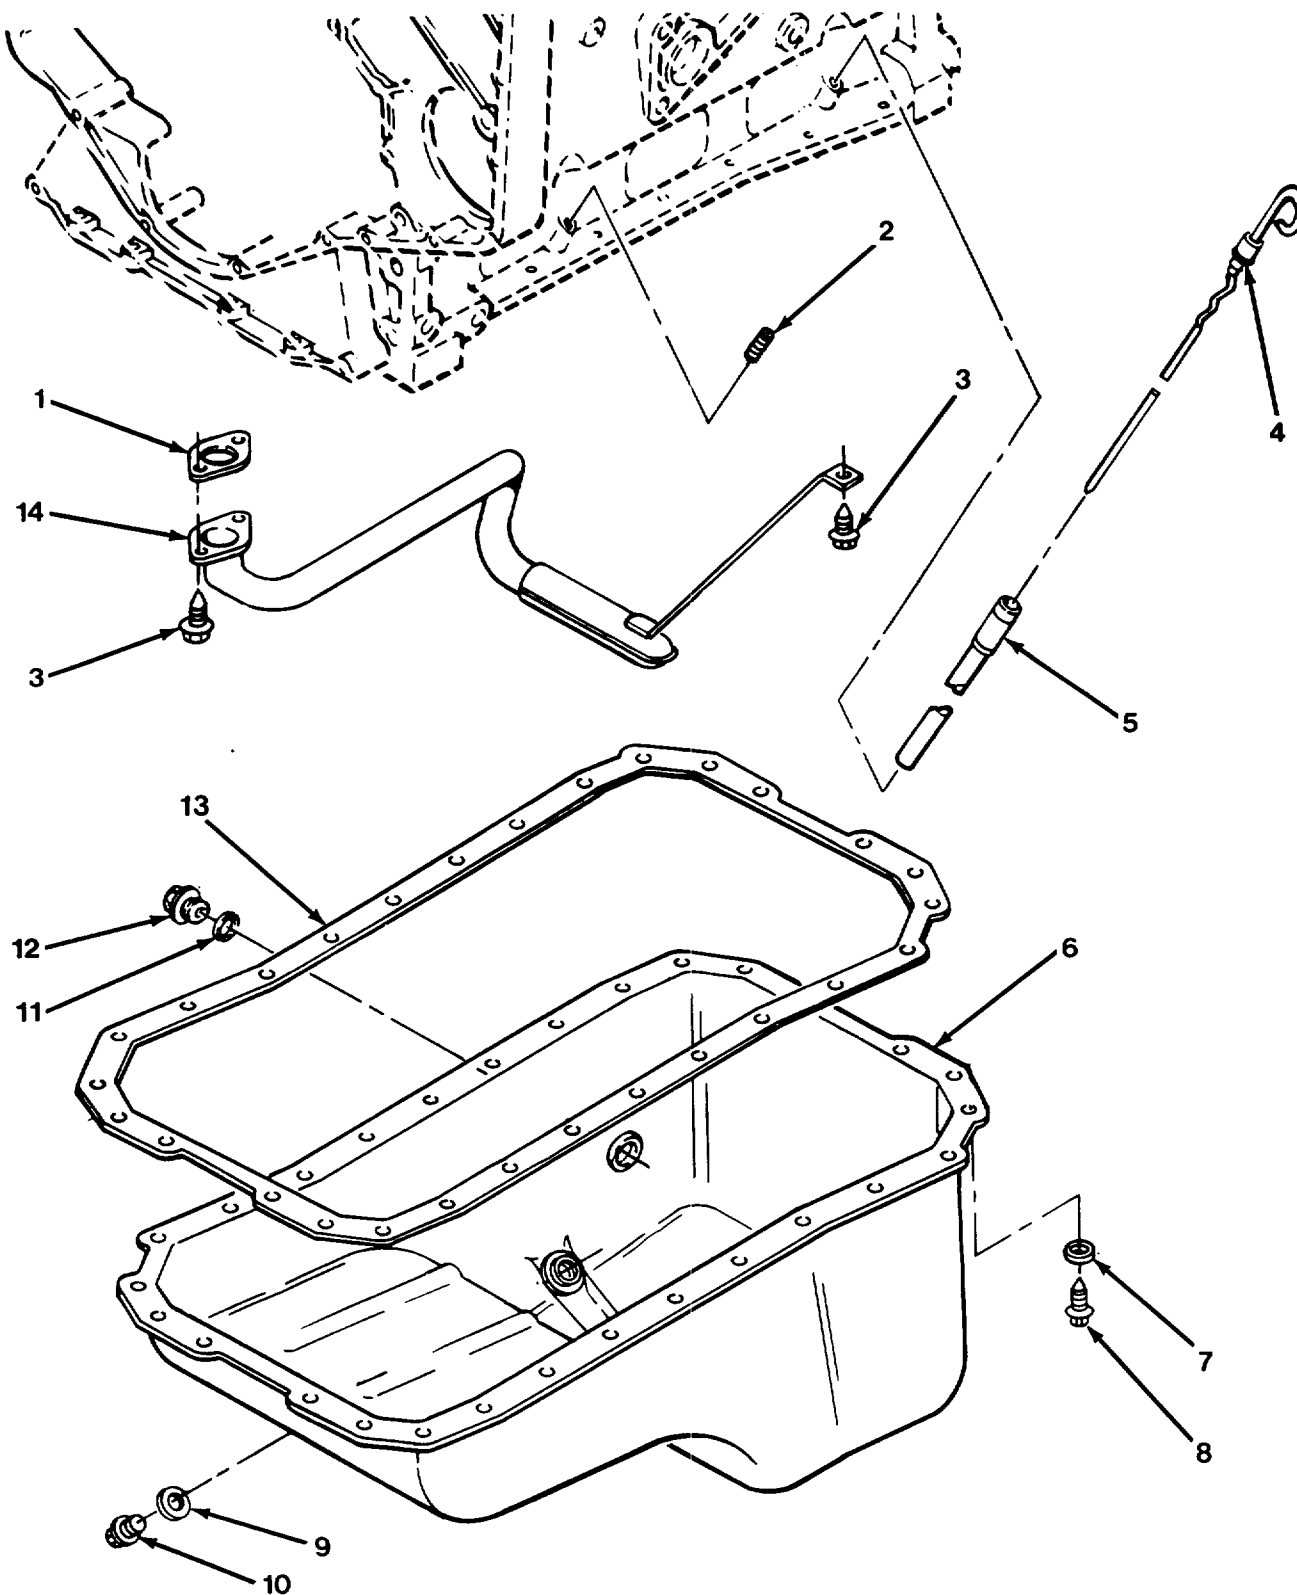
OIL PAN AND DIPSTICK ASSEMBLY
